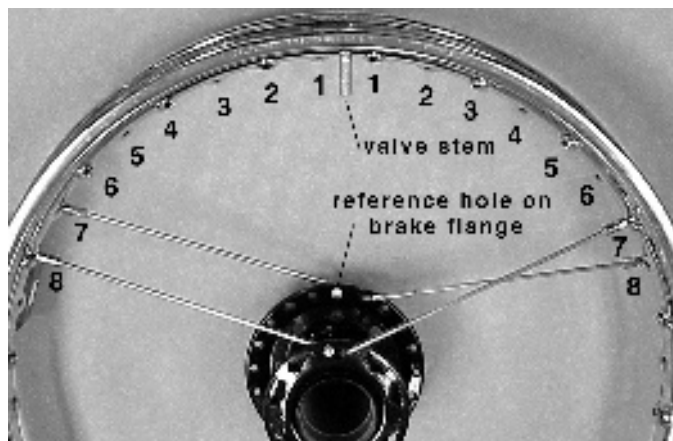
First set of 10 37-3402 spokes laced in the “brake drum” flange. First spoke goes ccw from inside into marked hole in hub and 7 holes ccw from valve stem. After lacing first spoke in referenced hole move two holes in the hub and four in the rim and install the next spoke.
